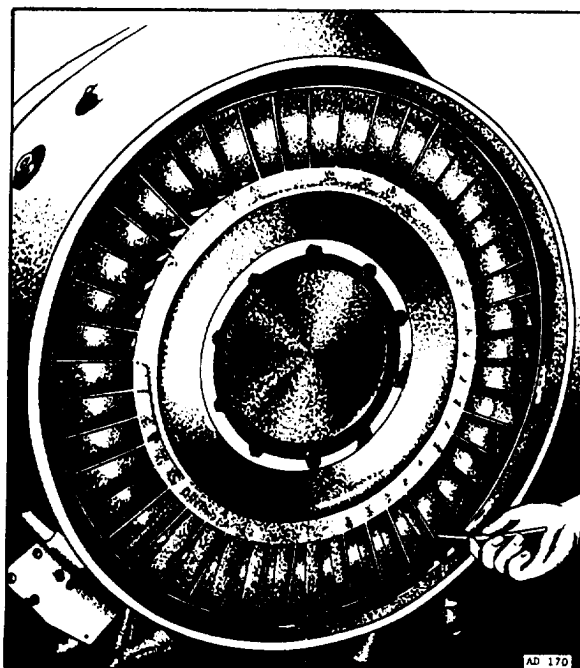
Measuring the turbine blade to shroud tip clearance.
